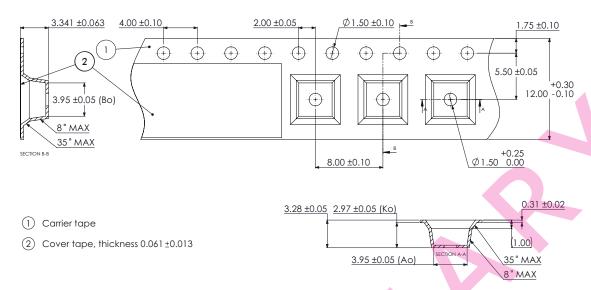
Pocket tape dimensions for L1I0-0XXX090000000.
